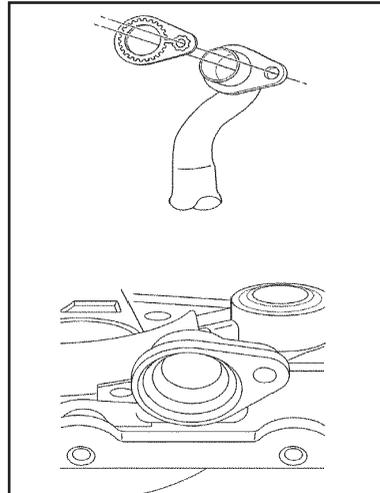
Oil pick up tube for 2004 GM 4.2L with face type seal (second design).
